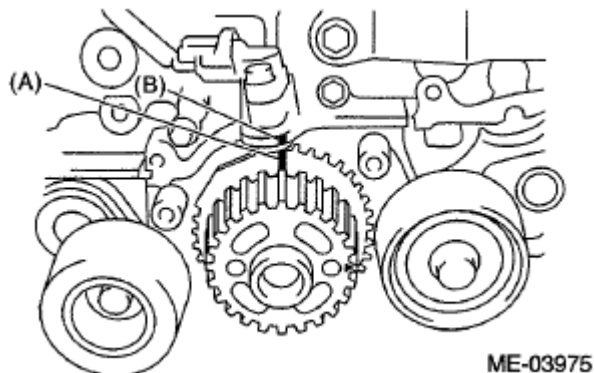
Aligning Mark On Crank Sprocket With Mark On Oil Pump
